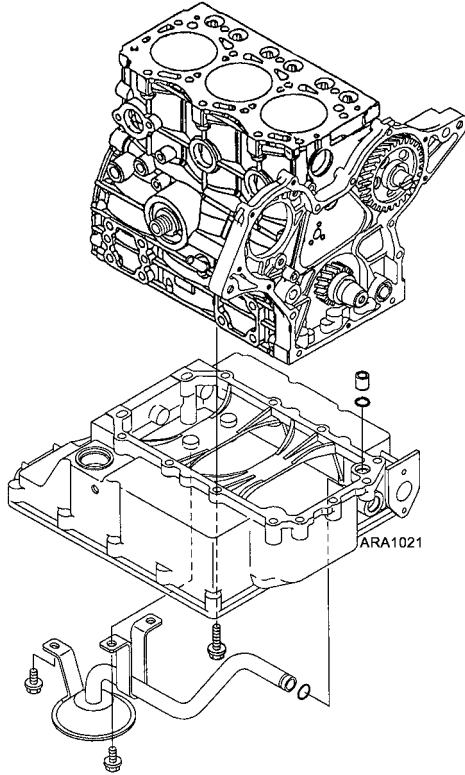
Remove Oil Pump Intake Pipe and Upper Part of Oil Pan
